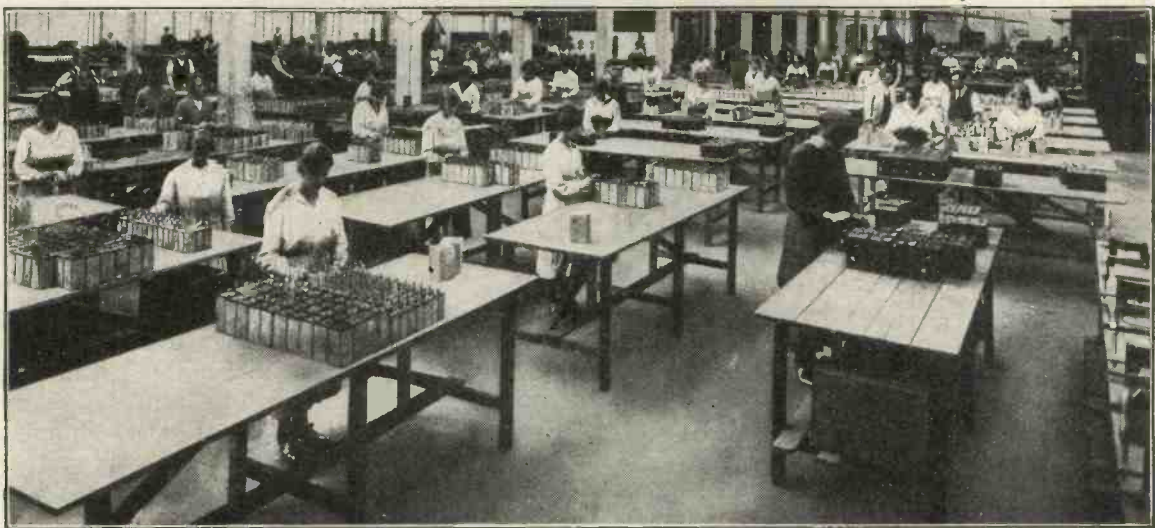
A view of the general assembling room at Messrs. Siemens, Ltd.
